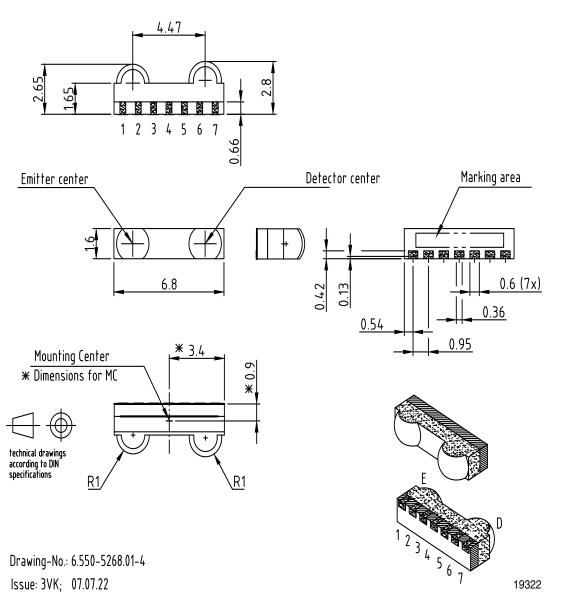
TFBS4650 Mechanical Dimensions, Tolerance ± 0.2 mm, if not otherwise mentioned
